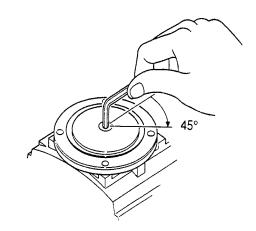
Additional 45° turn of Retainer Plate Fixing Screw (H) past Point "A"
